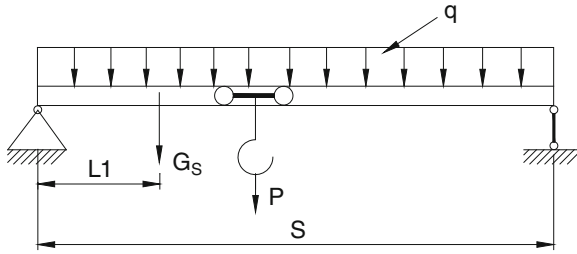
Typical loads and boundary conditions of the overhead bridge crane's main girders
